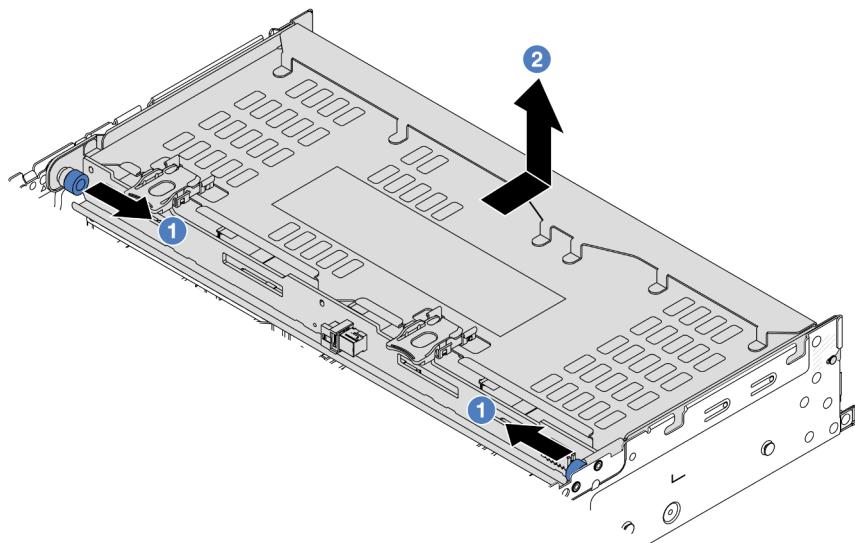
Removing the 4 x 3.5-inch rear drive cage
